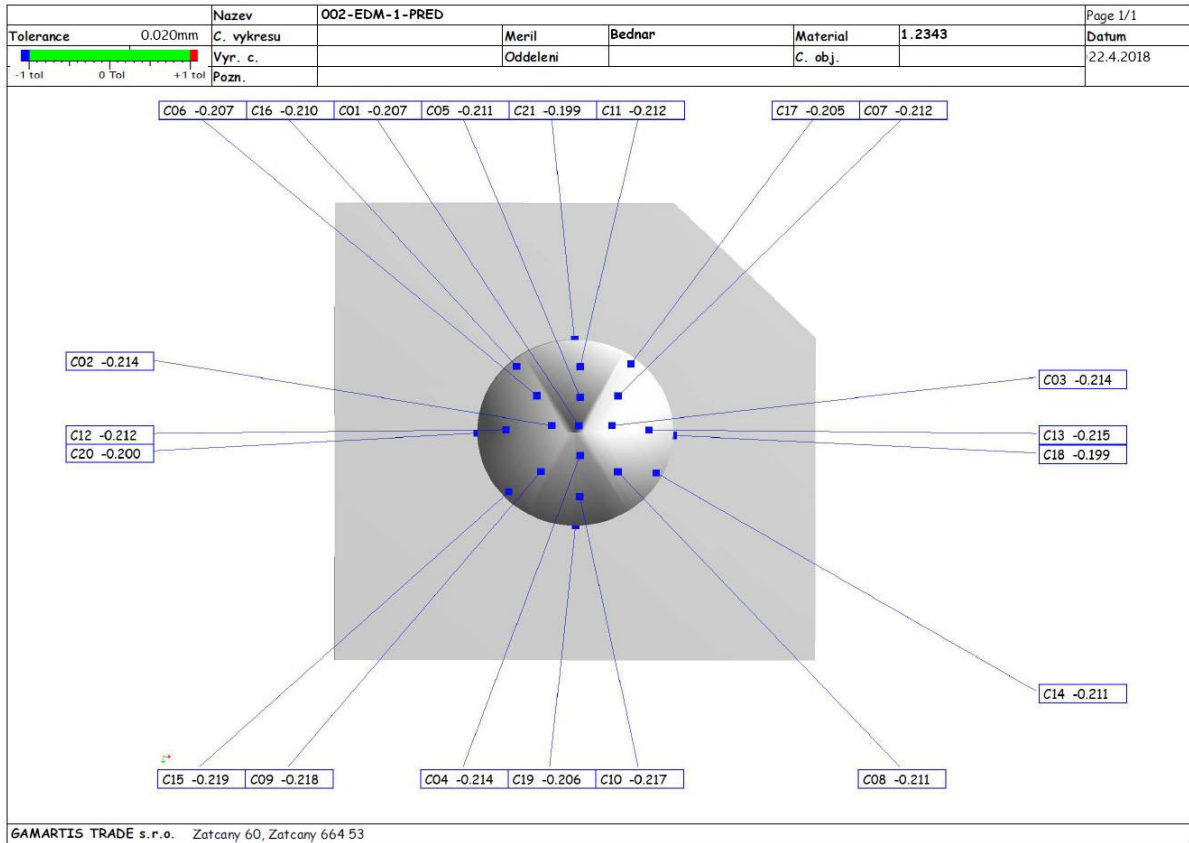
EDM-1 spherical shaped tool electrode measurement protocol.
